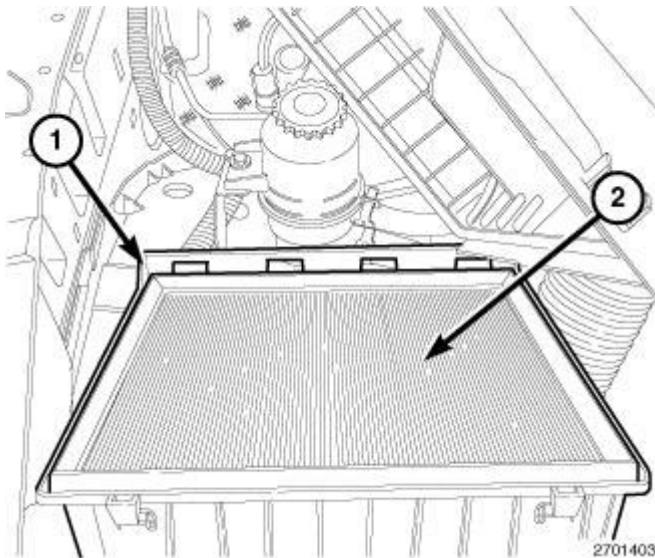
AIR CLEANER HOUSING & AIR CLEANER FILTER
